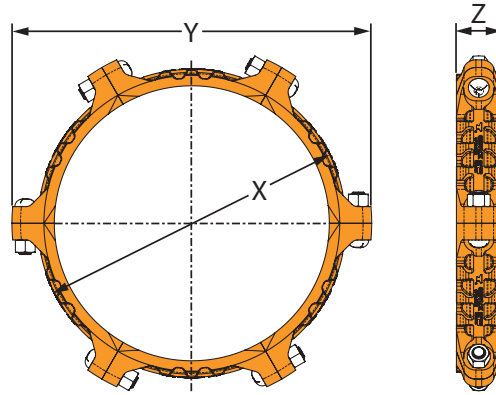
WELD RING GRUV-RING COUPLING
